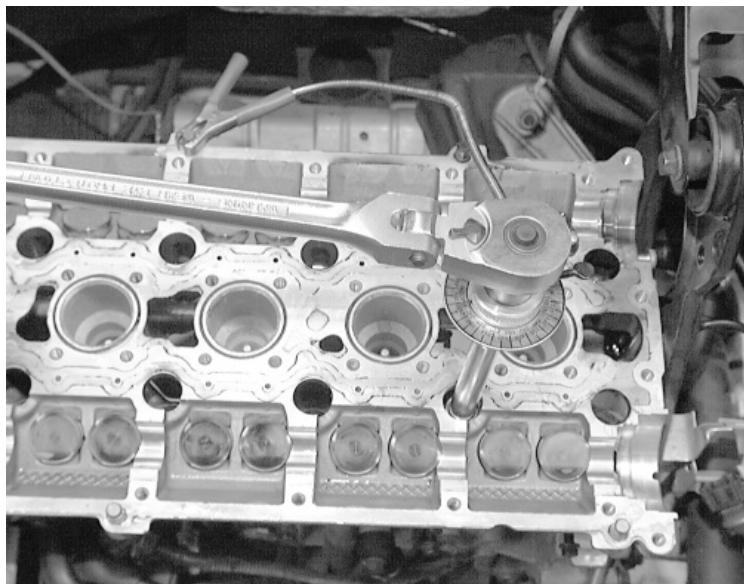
A torque angle gauge can be helpful when angle-tightening the head bolts
